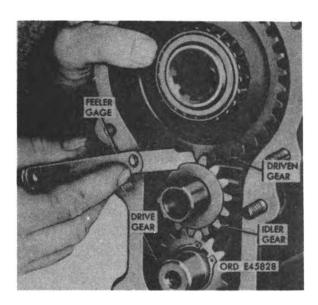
Checking backlash between helical drive gear, idler gear, and driven gear.
